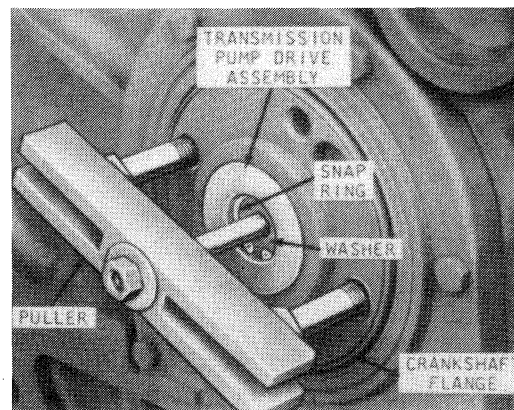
Clutch shaft pilot bushing adapter can be removed from crankshaft using a suitable puller as shown. Refer to text.
